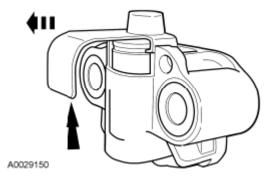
Locating Timing Chain Tensioner And Tensioner Arm bolts Courtesy of FORD MOTOR CO.
